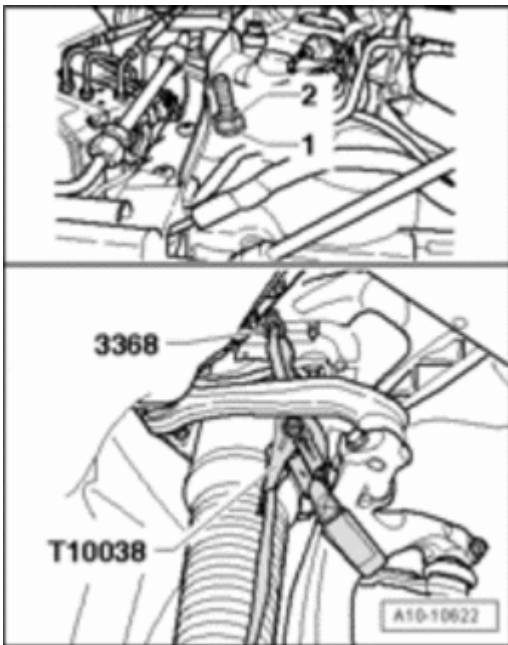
Securing Lifting Eyebolt 3368 With Nut With Washer Over Several Threads & Tie Up Wheel Bearing Housing At Left/Right With Tensioning Strap T10038
